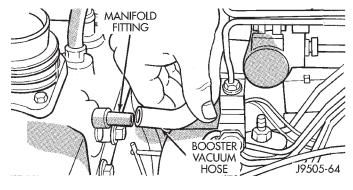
Booster Vacuum Hose Removal/Installation (From Manifold Fitting)
